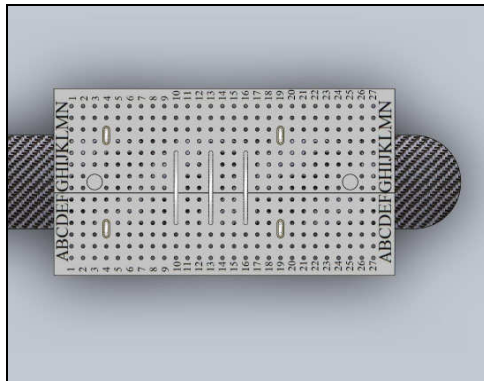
This is a top view of the finished peg board attached to the scanner bed.
